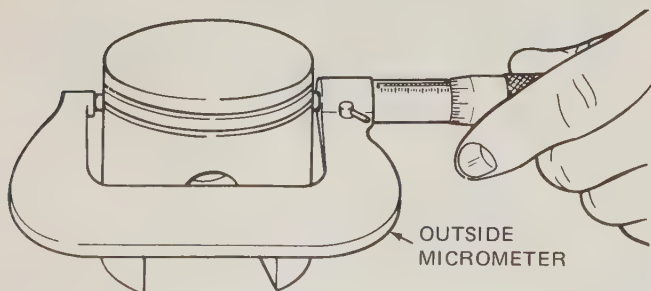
Measure piston skirt just below bottom ring and at a right angle to the piston pin. (Kohler Company)
